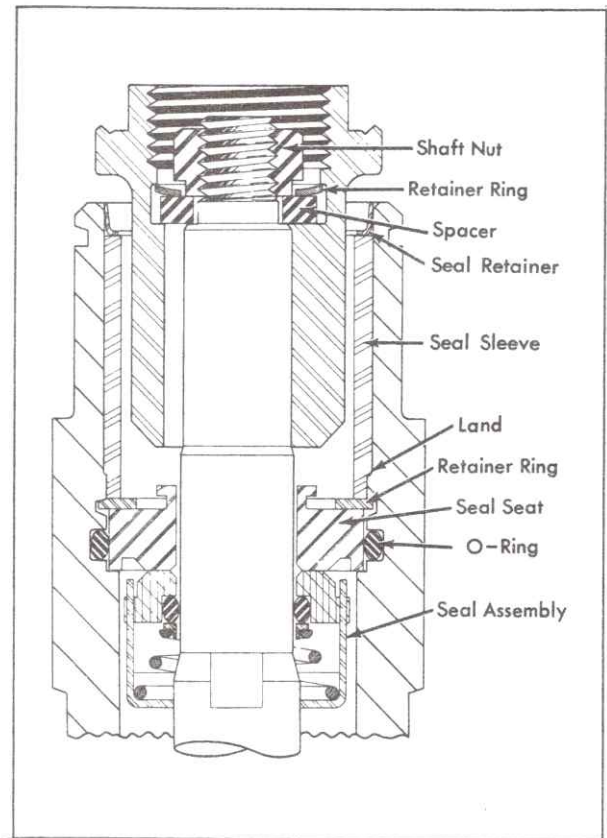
Shaft Seal &amp; Seal Seat Installed
